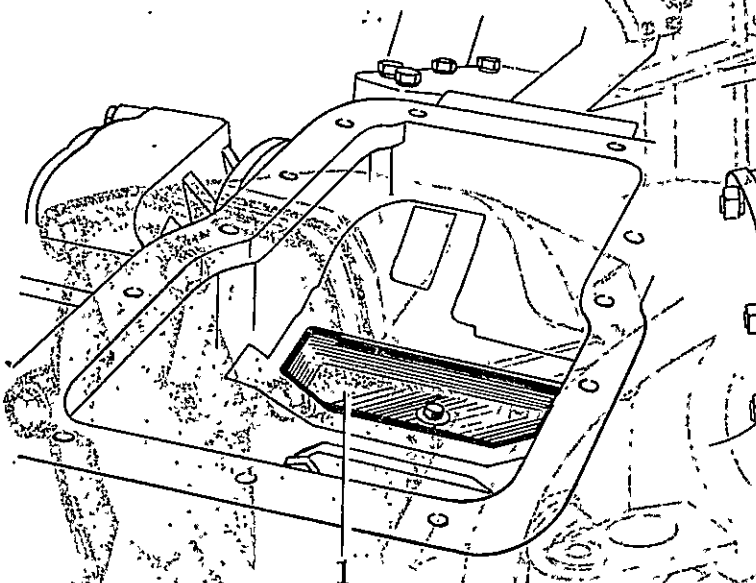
Driving spiral bevel pinion bearing oil bowl
